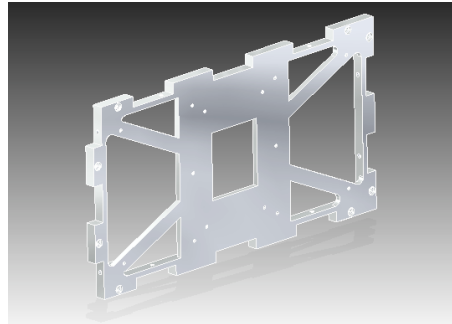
Thruster Side Plate with Milled-Out Crossbeams Evident
